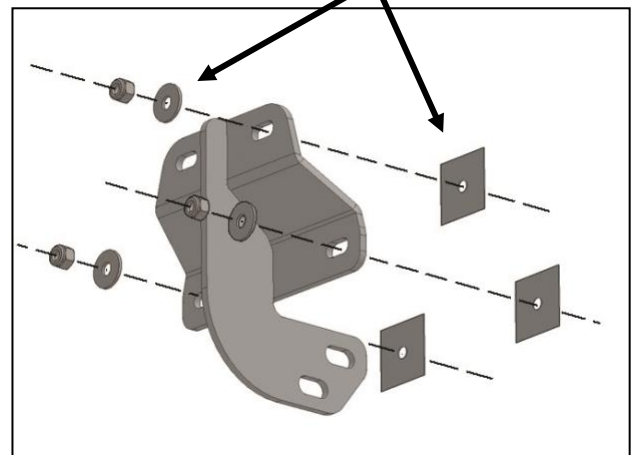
Thread Plastic Washers onto all mounting studs. Passenger side rear mounting location pictured
